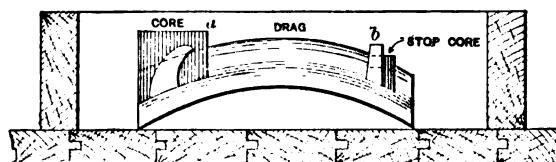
Showing How an Odd Shaped Projection May Be Made in a Core.
